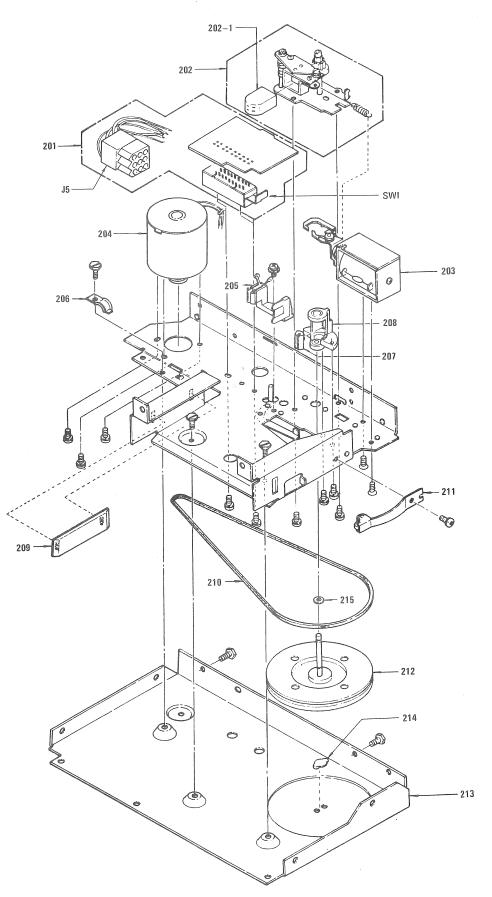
PARTS LOCATION, TAPE DECK ASSEMBLY
